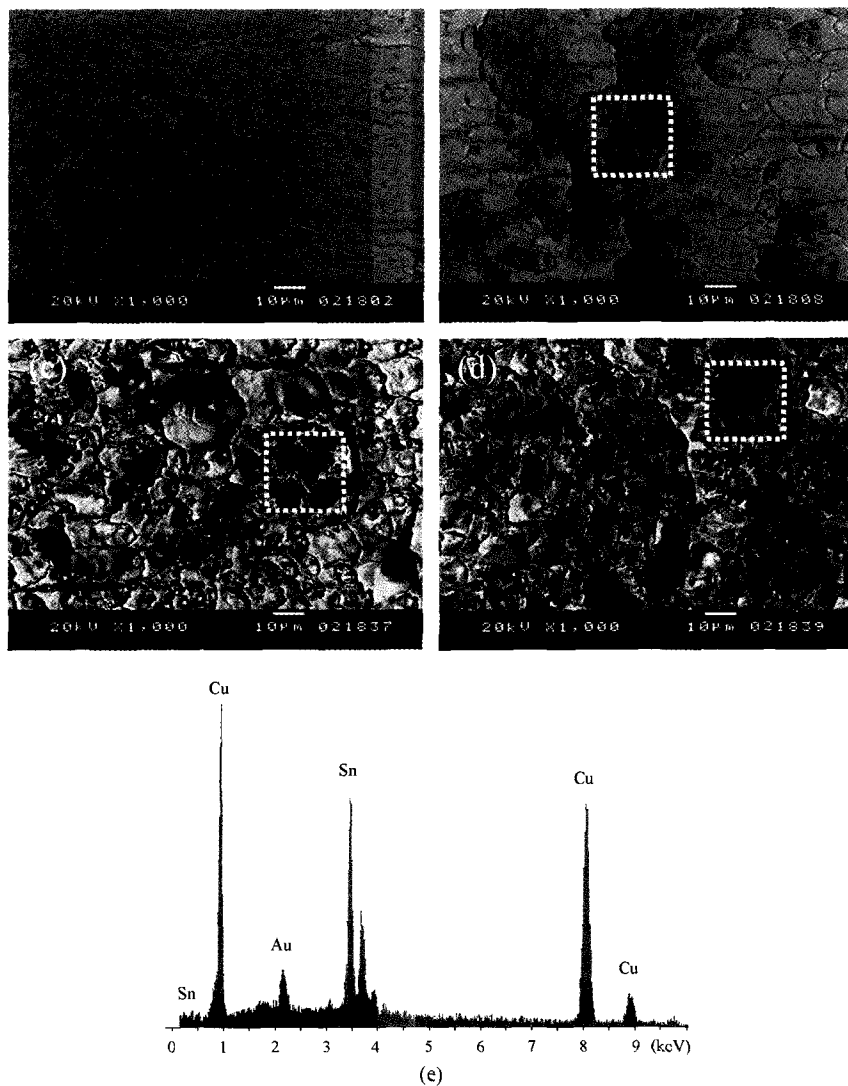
SEM(BEI) fractographs of the sheared fracture surfaces (the side of Cu pad) of the solder joints formed using different solders and soldering reaction times: (a) pure Sn for 1 min, (b) pure Sn for 4 min, (c) Sn-2.5Cu for 1 min, and (d) Sn-2.5Cu for 4 min. (e) EDS spectrum obtained from the marked region in (b), indicating the exposure of the intermetallic η layer to the fracture surface. Au peak in the spectrum results from the conductive Au coating for SEM observation. EDS spectra similar to (e) could also be obtained from the marked regions in (c) and (d).
